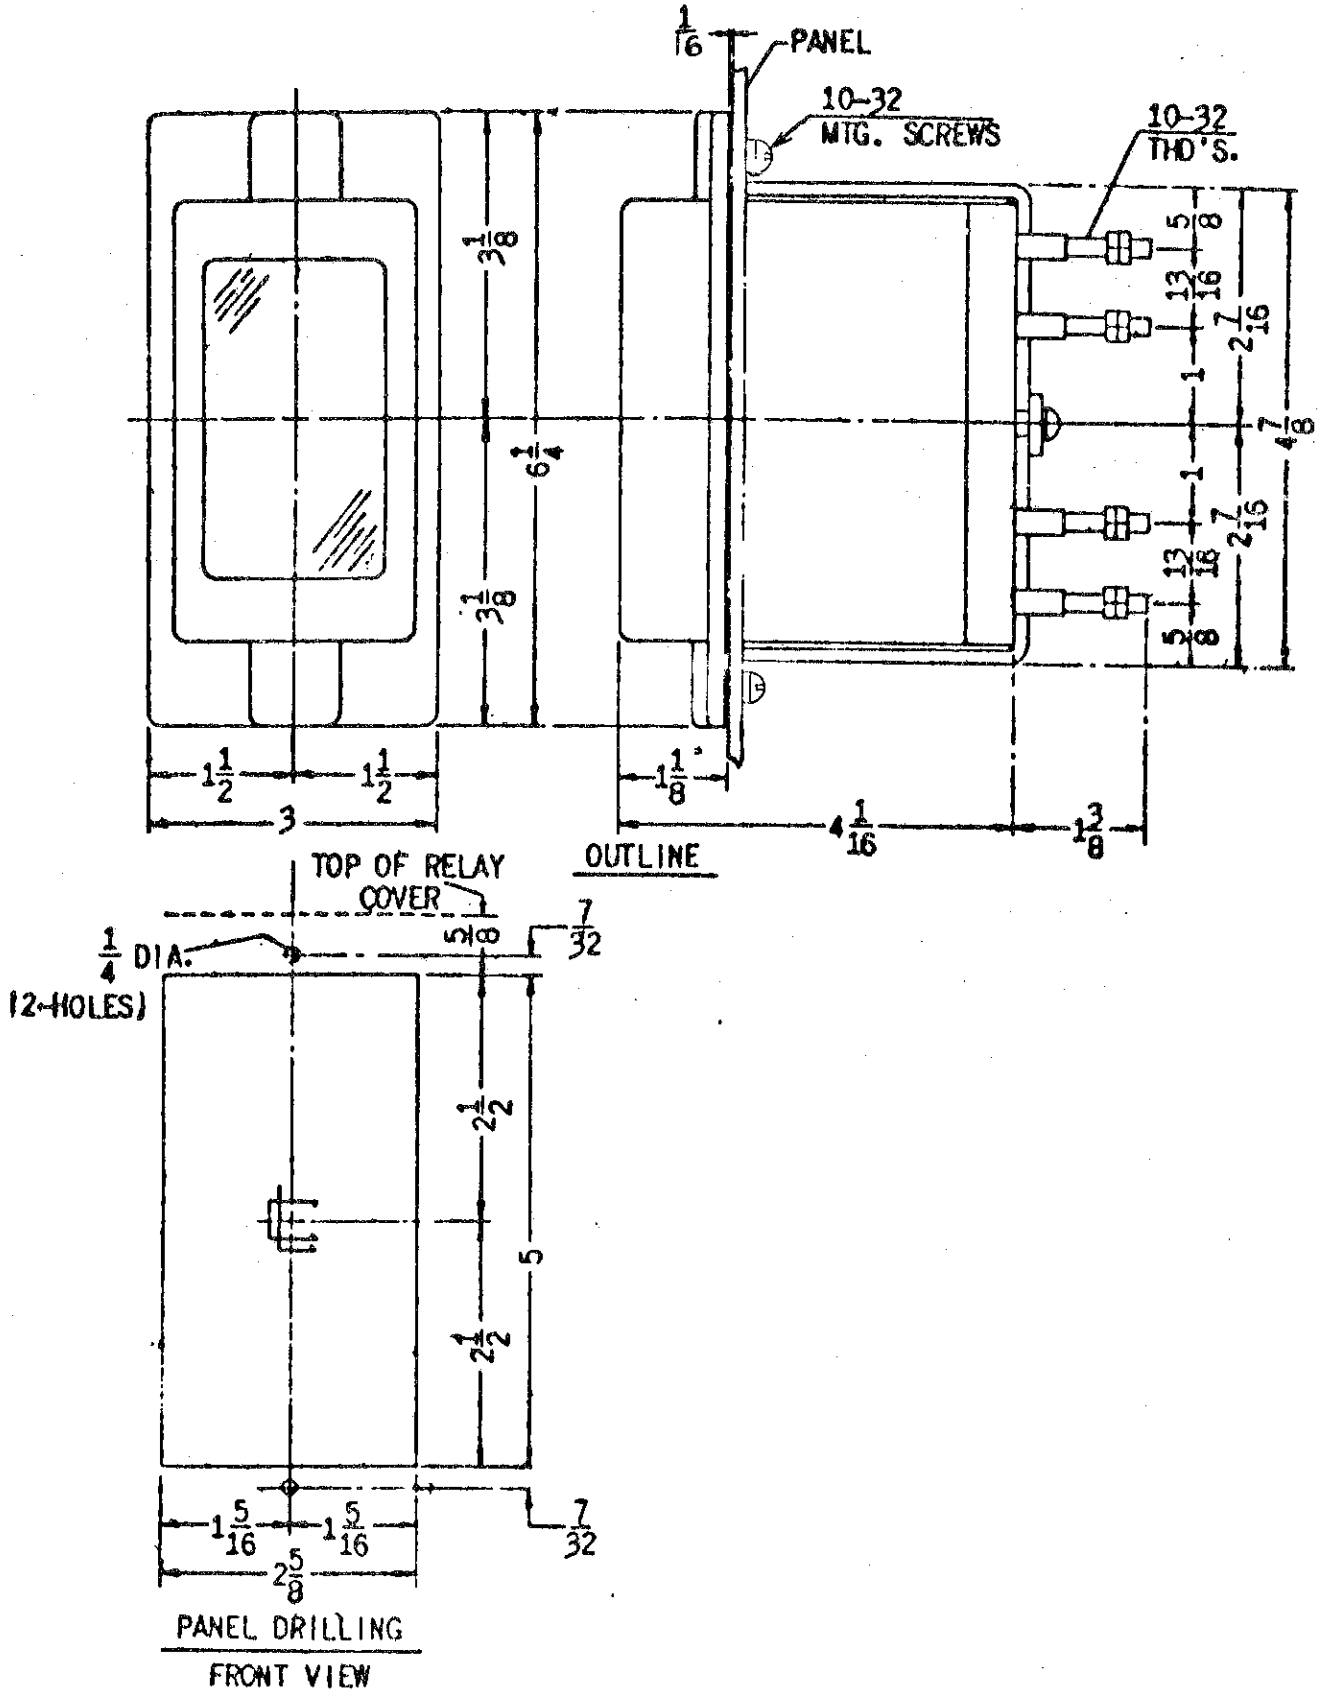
(0148A3978-6) Outline And Panel Drilling Dimensions For The Semi-Flush Mounted NGA15AB Relay
